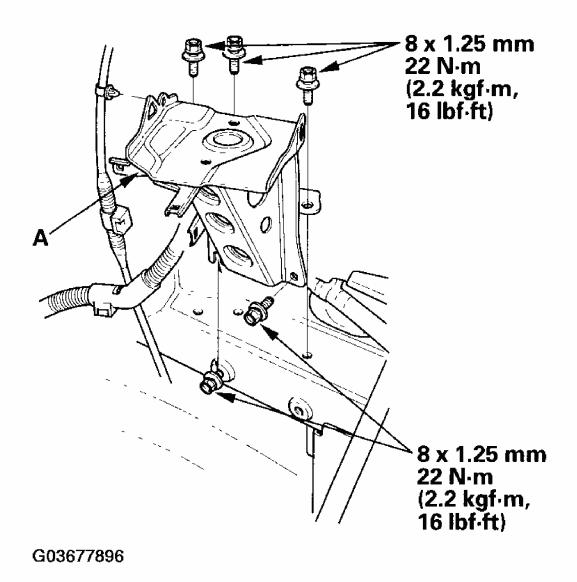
Identifying Tightening Torque Of Battery Base Bolts Courtesy of AMERICAN HONDA MOTOR CO., INC.
